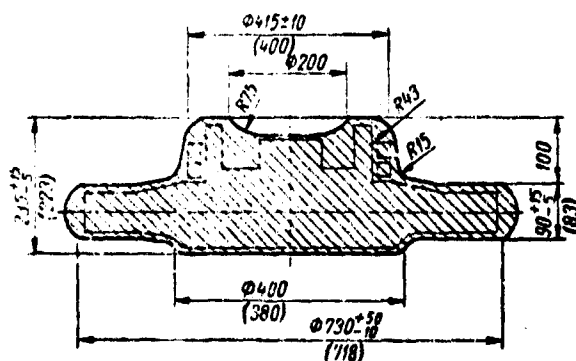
Forged wheel (weighing 460 kg) fabricated by sectional stamping.
